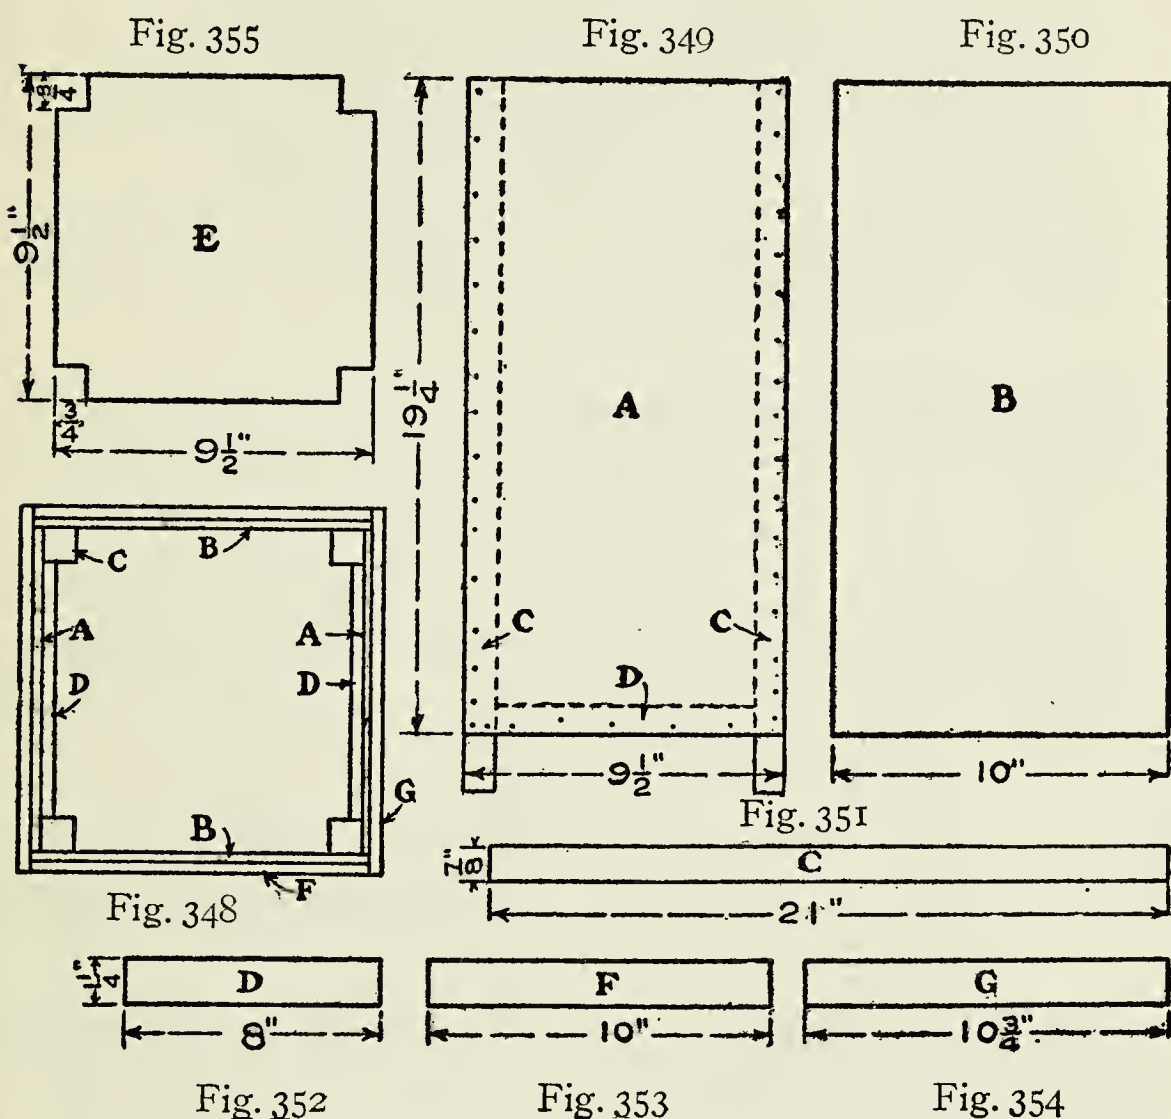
PLAN OF WALLBOARD WASTE-BASKET
